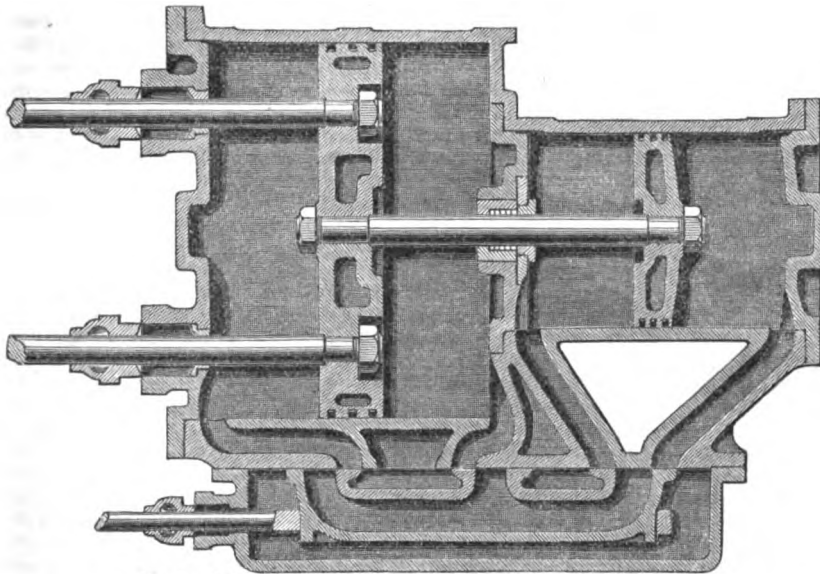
END-TO-END CYLINDER ENGINE.—Section of Cylinders and Valve.
